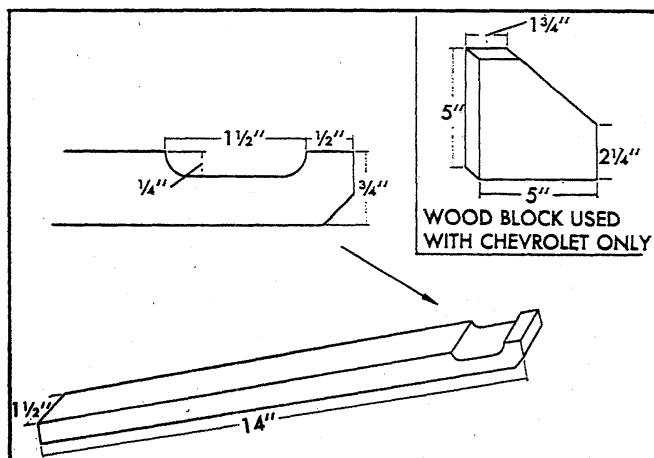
Spring Removal Tools - Chevrolet, Chevelle and Camaro
